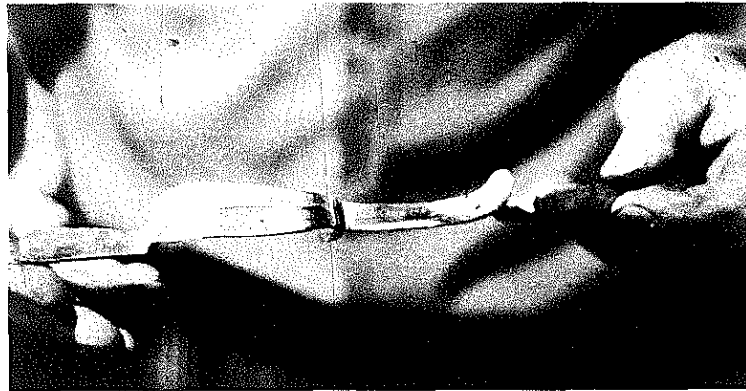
Hershel solders around the rivet for reinforcement. Here is the completed triggerguard and grip rail after being soldered, filed, and smoothed.
